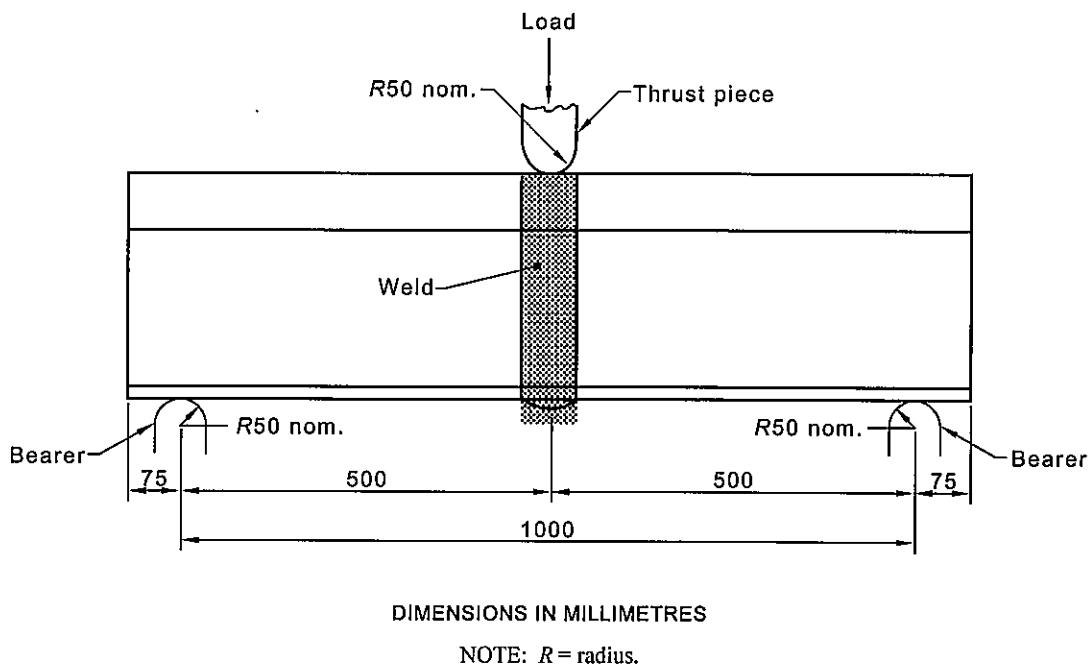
TYPICAL TESTING ASSEMBLY FOR SLOW BEND TEST
